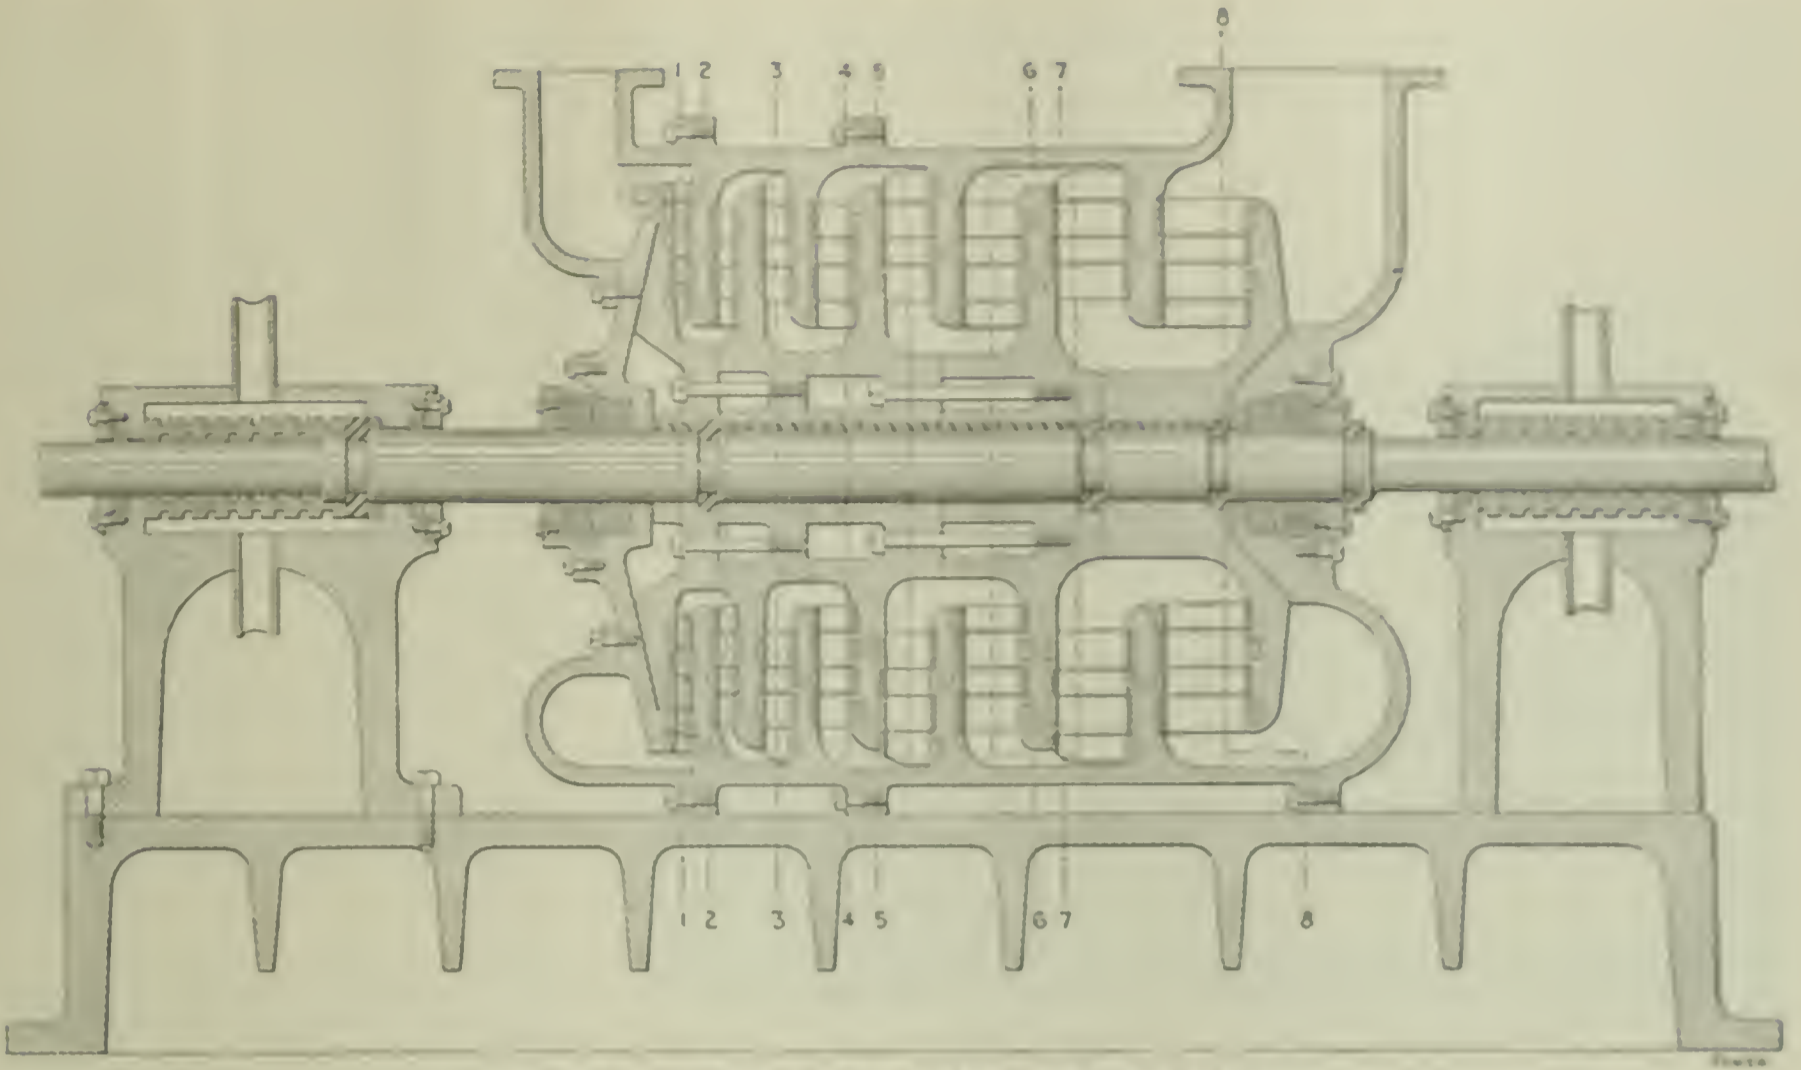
SECTIONAL VIEW OF BINOM STEAM TURBINE
